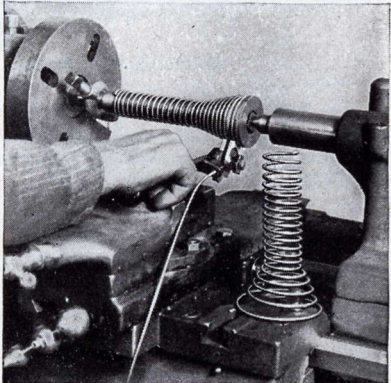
Winding a spiral spring on a special shaped arbor held between centers on the lathe.
